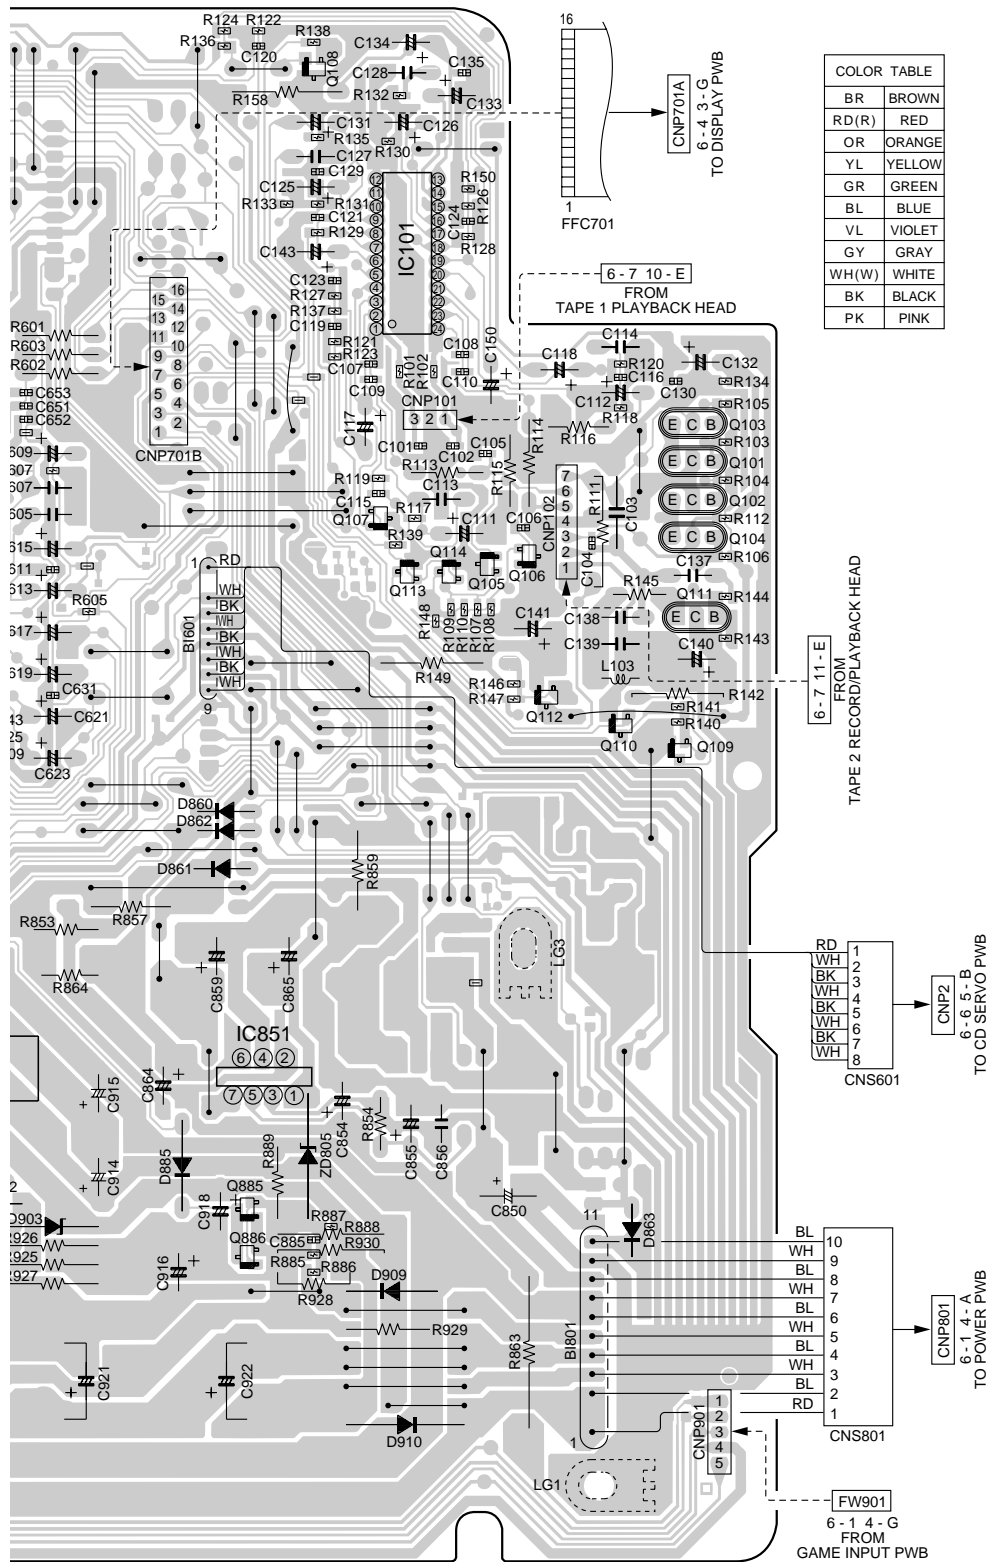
WIRING SIDE OF P.W.BOARD (1/7)
